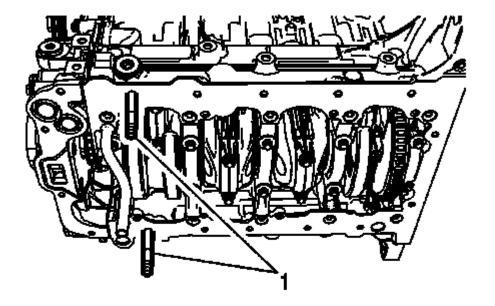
Oil Pan & Bolts Courtesy of GENERAL MOTORS COMPANY
